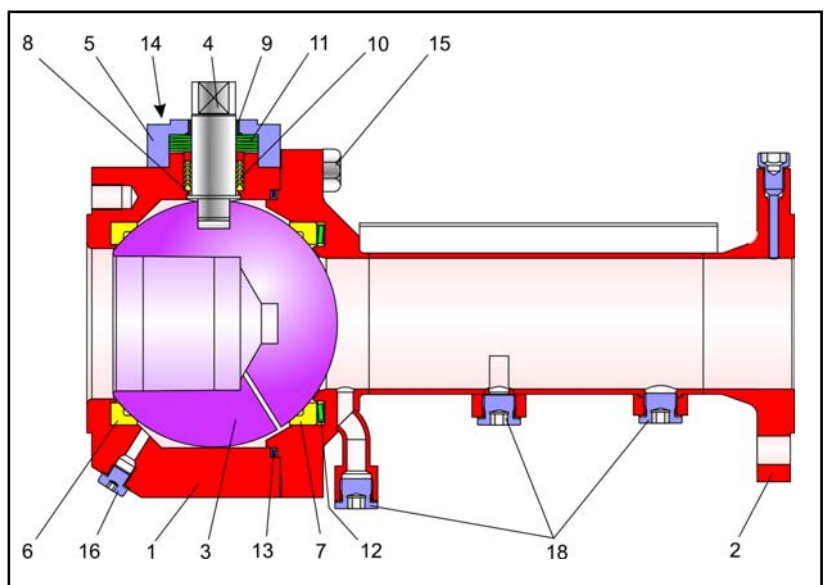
Sectional view of the pig loading ball valve, series 28e => Parts list, see table 1 on page 2
